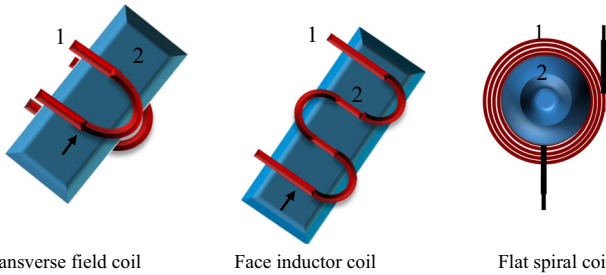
Configuration of induction heating for heating of workpieces/heatpiece: 1, coil; 2, workpiece/heatpiece (adapted from Kolleck et al. and Frogner et al. [13, 15])
